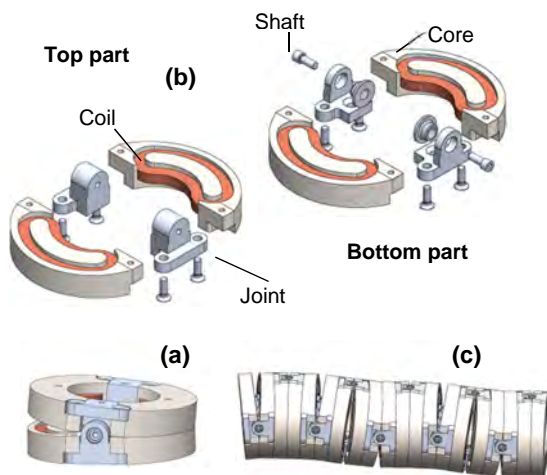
(a) CAD model of one ETA, (b) exploded view of its components, (c) fully actuated shaft with twisted actuators [9]
